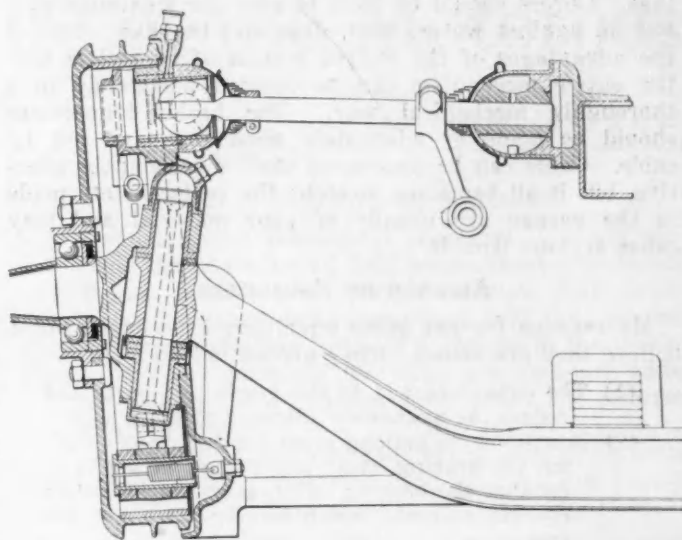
BRAKE-CONTROLS OF THE PERROT FOUR-WHEEL BRAKE SYSTEM
